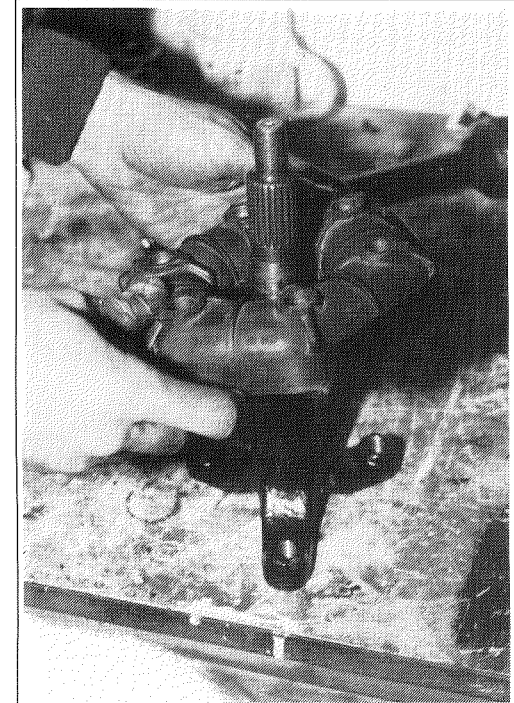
Photo showing definitely *not* the way to reassemble the drive shaft. Note that the outer drive shaft section leading to the hub doesn't pass through the rubber coupling which makes the overall drive shaft assembly about two inches too long. No wonder the lower wishbone wouldn't mate with its chassis bracket. Read on to see the correct way
